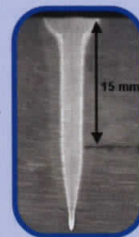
Typical macro-photograph of EBW weld cross-section
